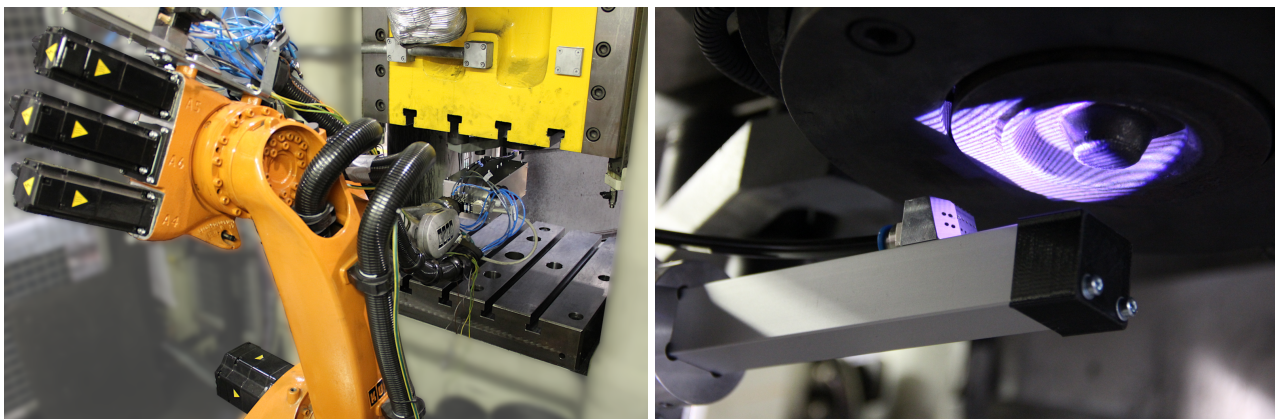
Measurement of the forging tool with a robot-assisted endoscopic fringe projection system. (left) Clutching of the endoscopic fringe projection system to the robot by means of a quick tool change system. (right) Close-up of a fringe projection measurement of the upper die.
